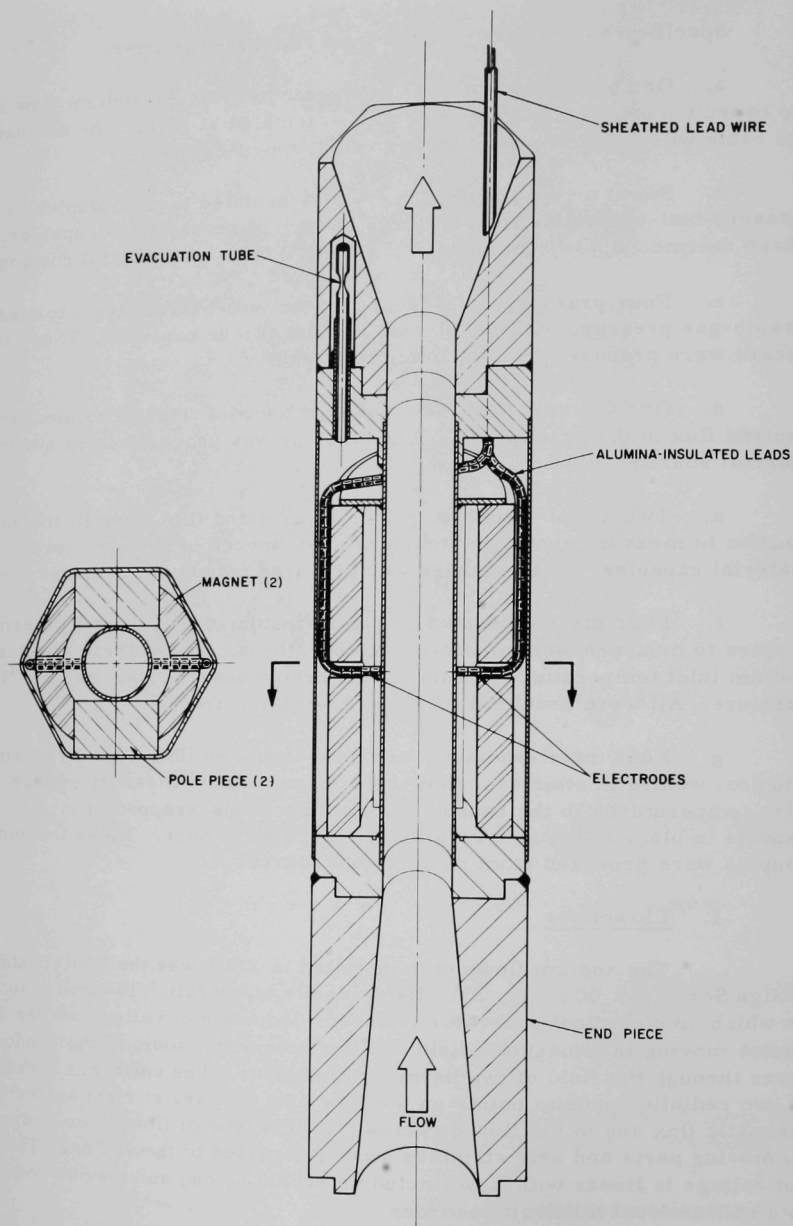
Mark-II Sodium Flowmeter Used in Subassembly XX01. ANL Neg. No. 113-2521 Rev. 1.
